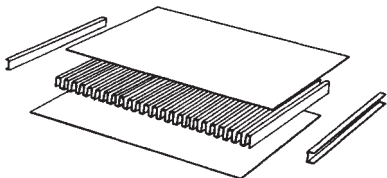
Exploded view of a typical plate-fin arrangement. (Trane Co.)
